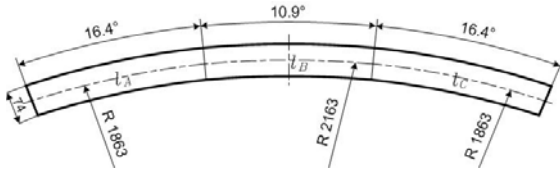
Dimensions and geometry of curvature for the vehicle bumper
